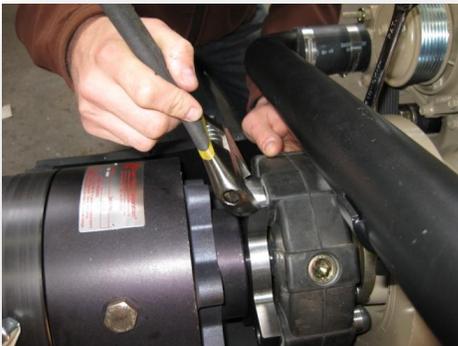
Use a wrench to turn the engine for access to all of the radial bolts.
